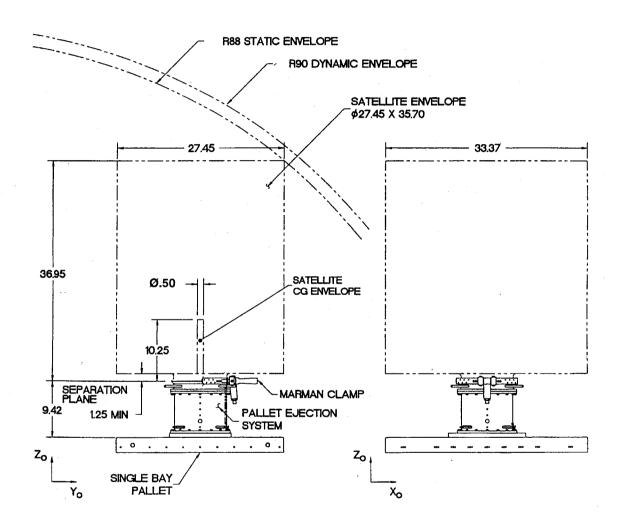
PALLET EJECTION SYSTEM ON SINGLE BAY PALLET
